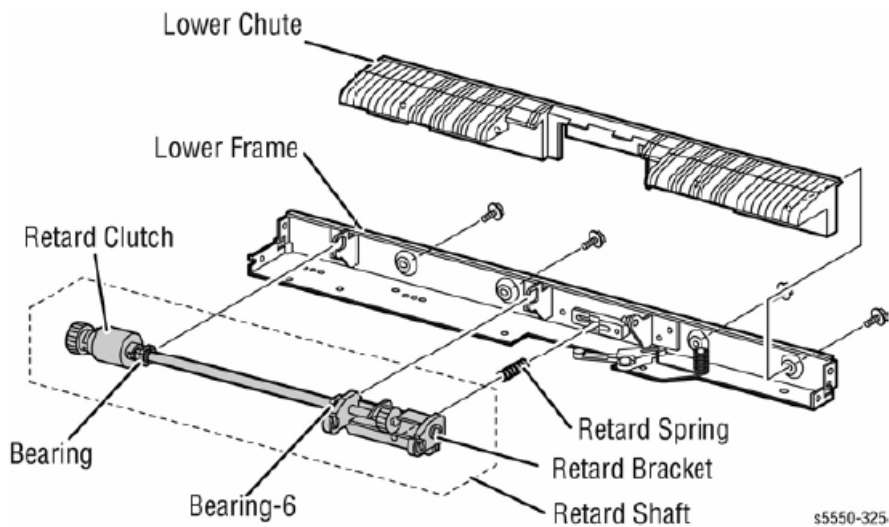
Removing the Retard Clutch, Bracket, or Spring
